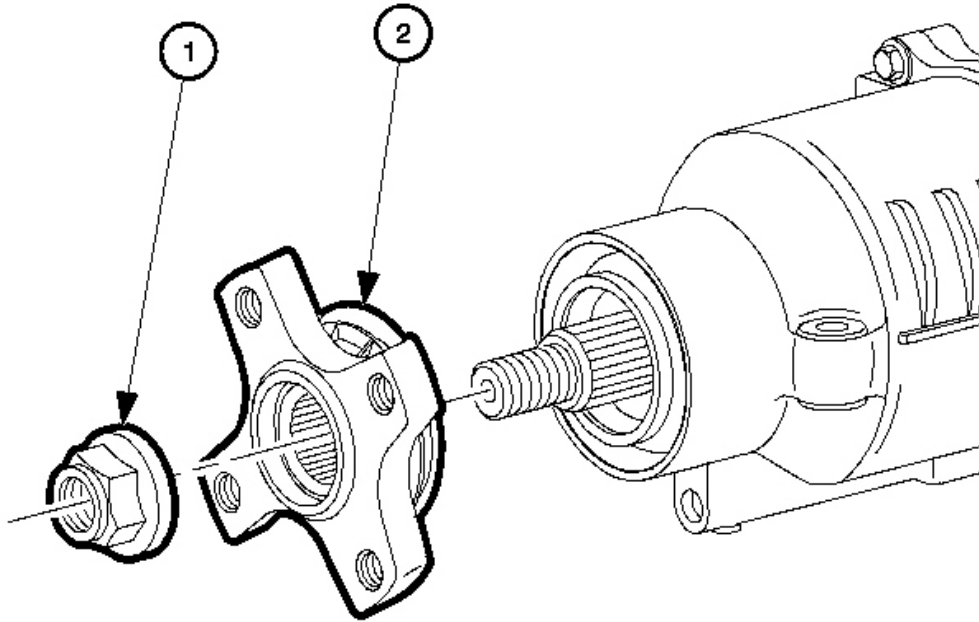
Removing/Installing Pinion Flange Nut On The RDM
